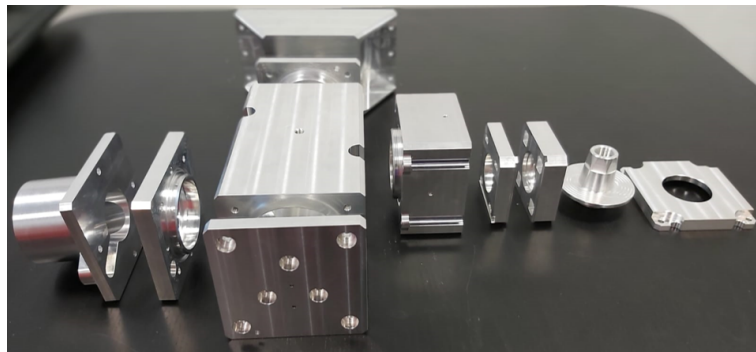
Photo of an exploded view of the machined parts for the modular frame and the interface bracket.
